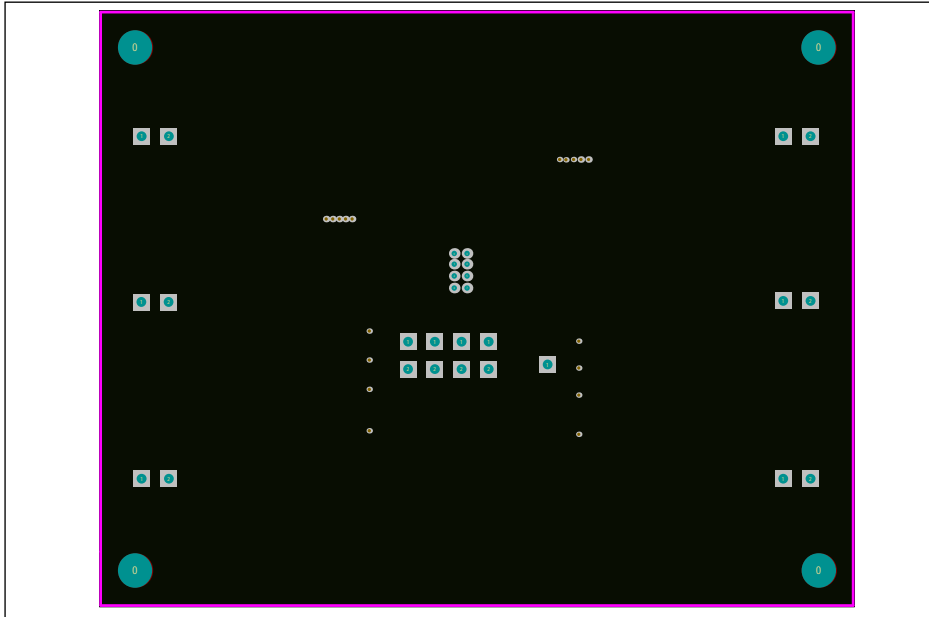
Board Component Placement Guide - Bottom Layer (SOP-8-EP)
